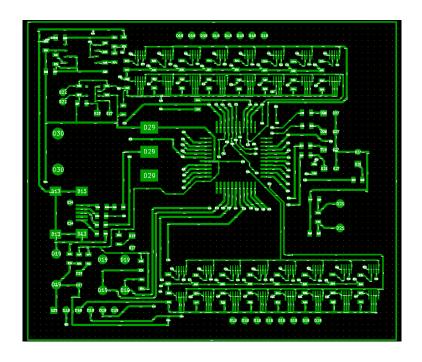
Front Layer of PCB Design Using Microcontroller PIC18F4550
